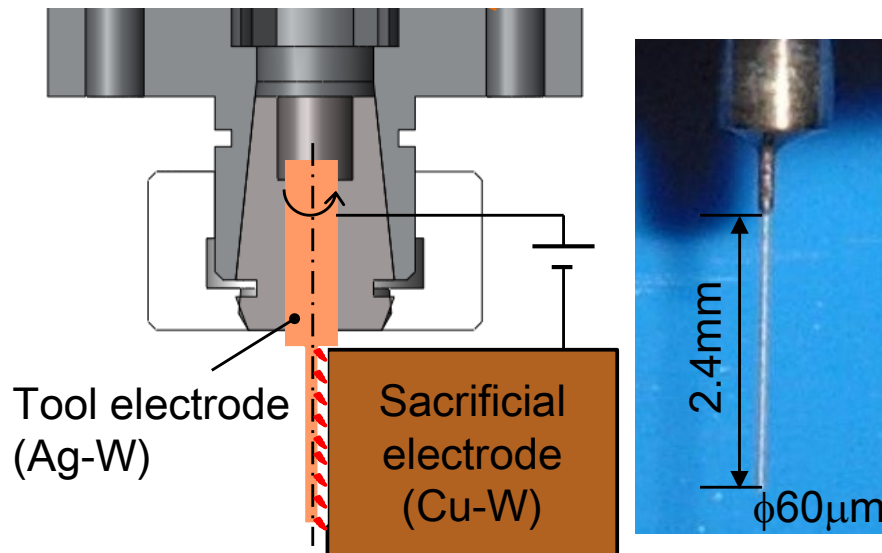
On-machine fabrication of micro electrode and a fabricated micro electrode
